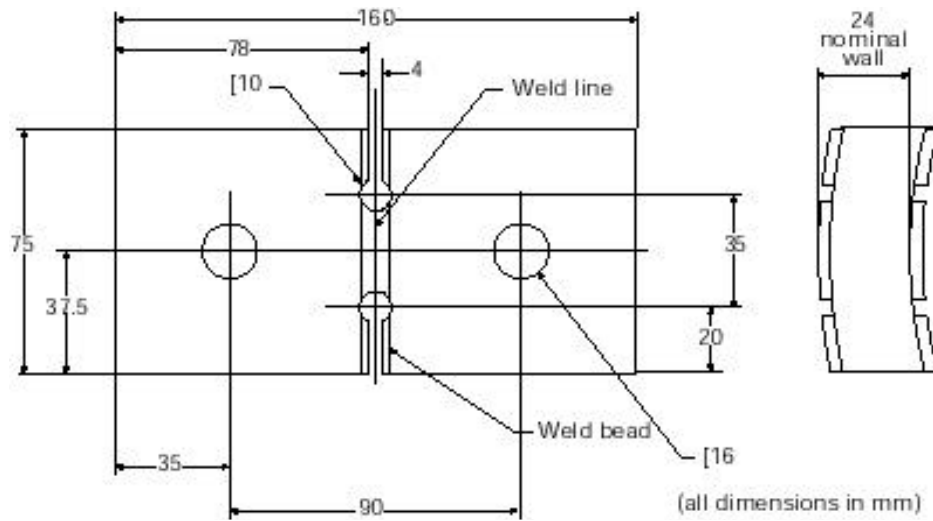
Geometry and dimensions of the dumb-bell tensile specimen.
